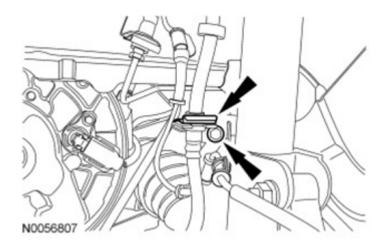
Locating Brake Hose Retainer And ABS Sensor Retaining Bolt Courtesy of FORD MOTOR CO.
